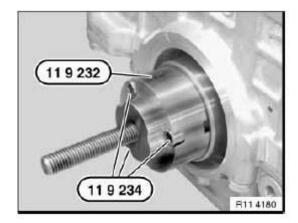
Screwing Special Tool To Crankshaft Courtesy of BMW OF NORTH AMERICA, INC.
